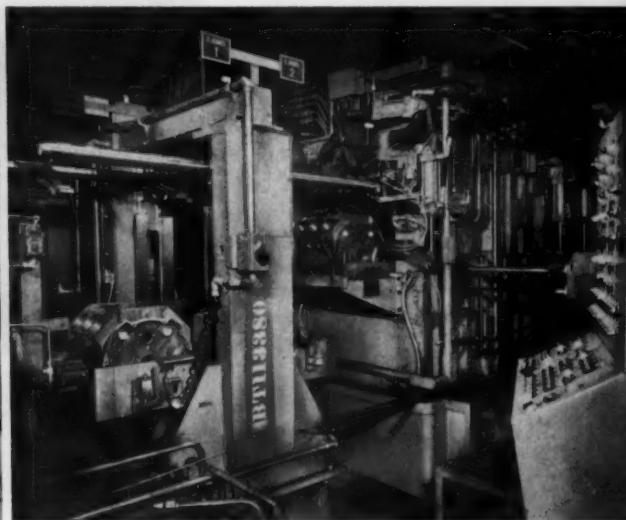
Loading end of eleven-station transfer machine where cam bearings are core-drilled and bored, and center bearing is faced.
